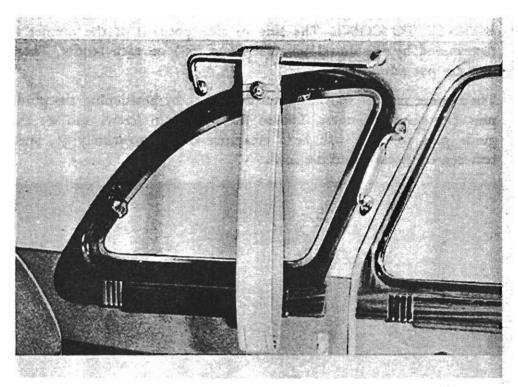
Take Out the Rear Quarter Window Wing Finishing Moulding Screws and Remove the Moulding.
